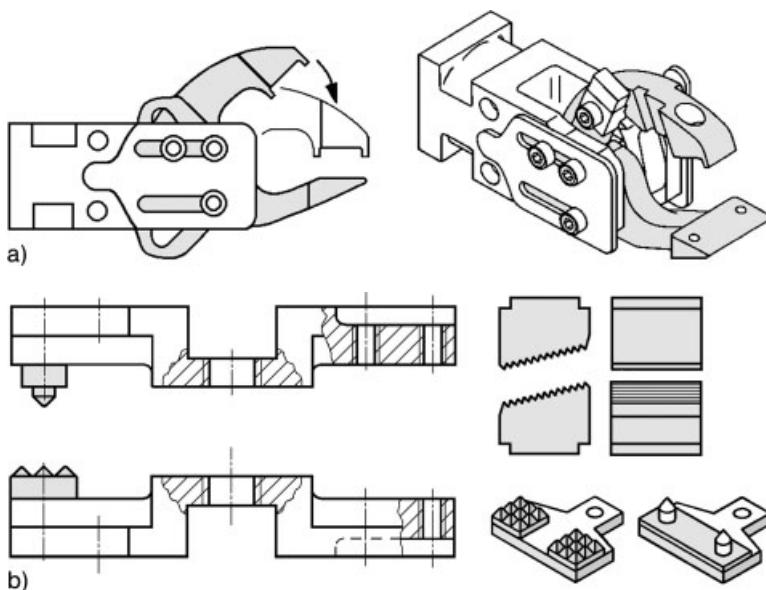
Sheet steel impactive gripper with large aperture angle (phd, USA)
